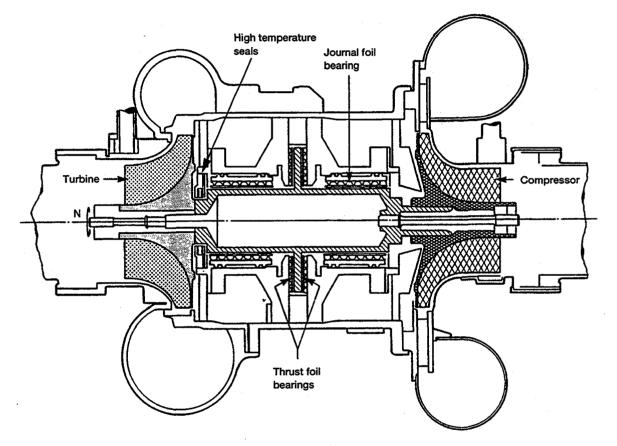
Schematic cross section of foil gas bearing supported turbocharger. Adapted from ref. 20.
